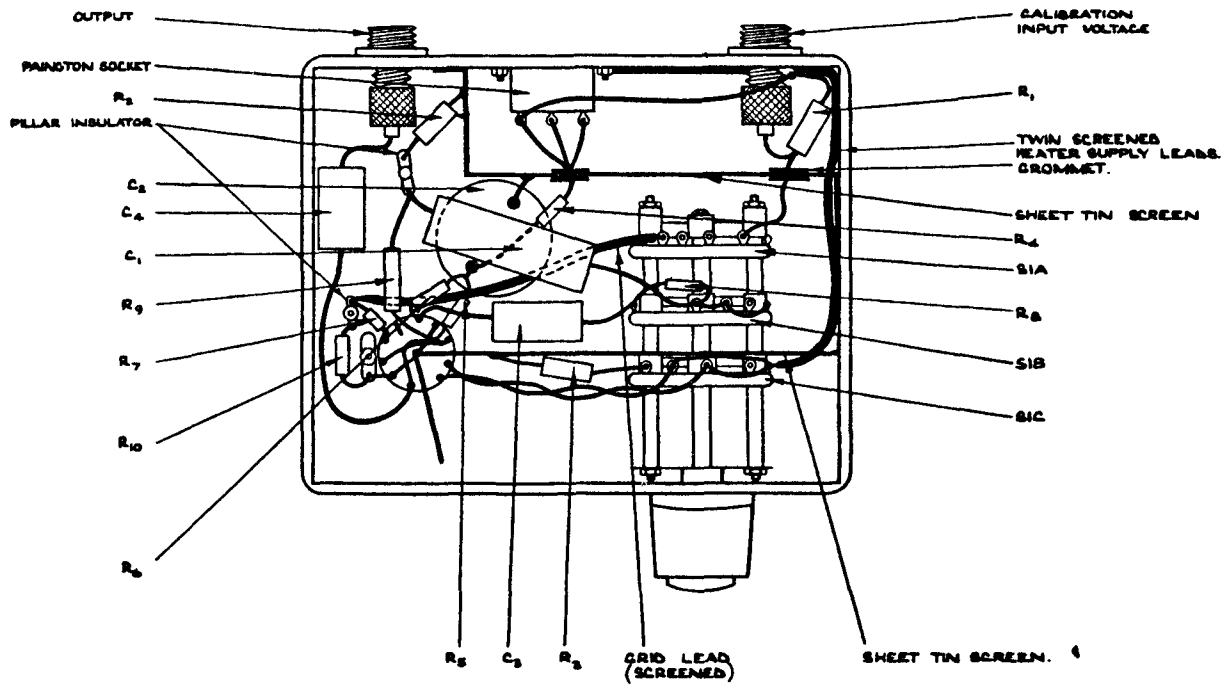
WIRING & COMPONENT LAYOUT OF UNIT I.
